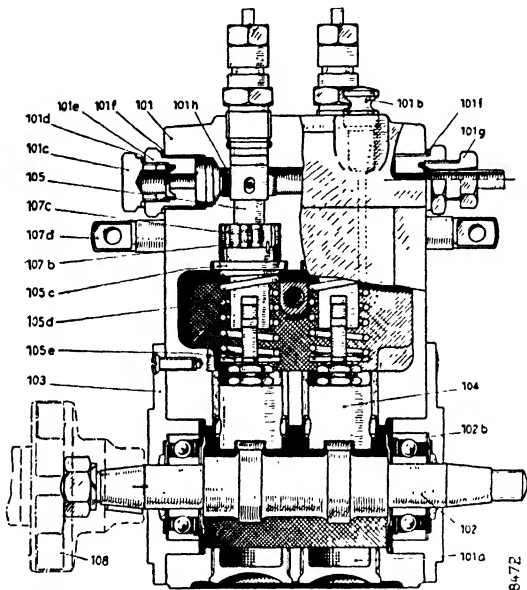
SECTION THROUGH THE BOSCH DIESEL ENGINE FUEL PUMP.
